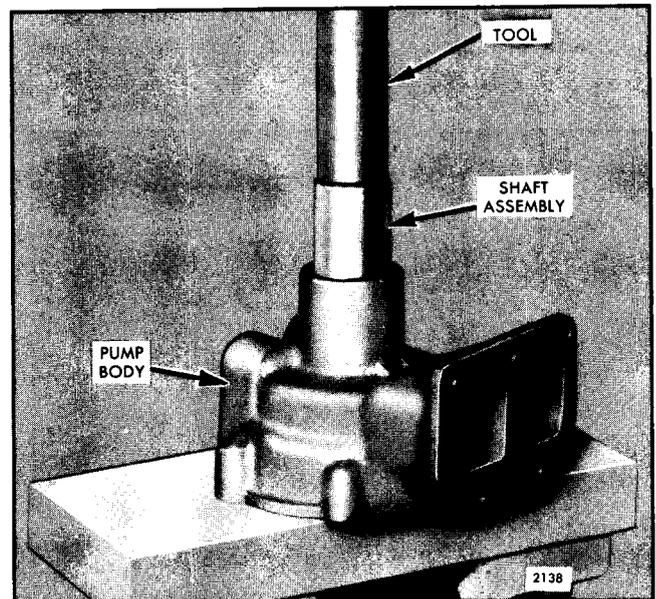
Pressing Shaft Assembly into Water Pump using Tool J 1930
